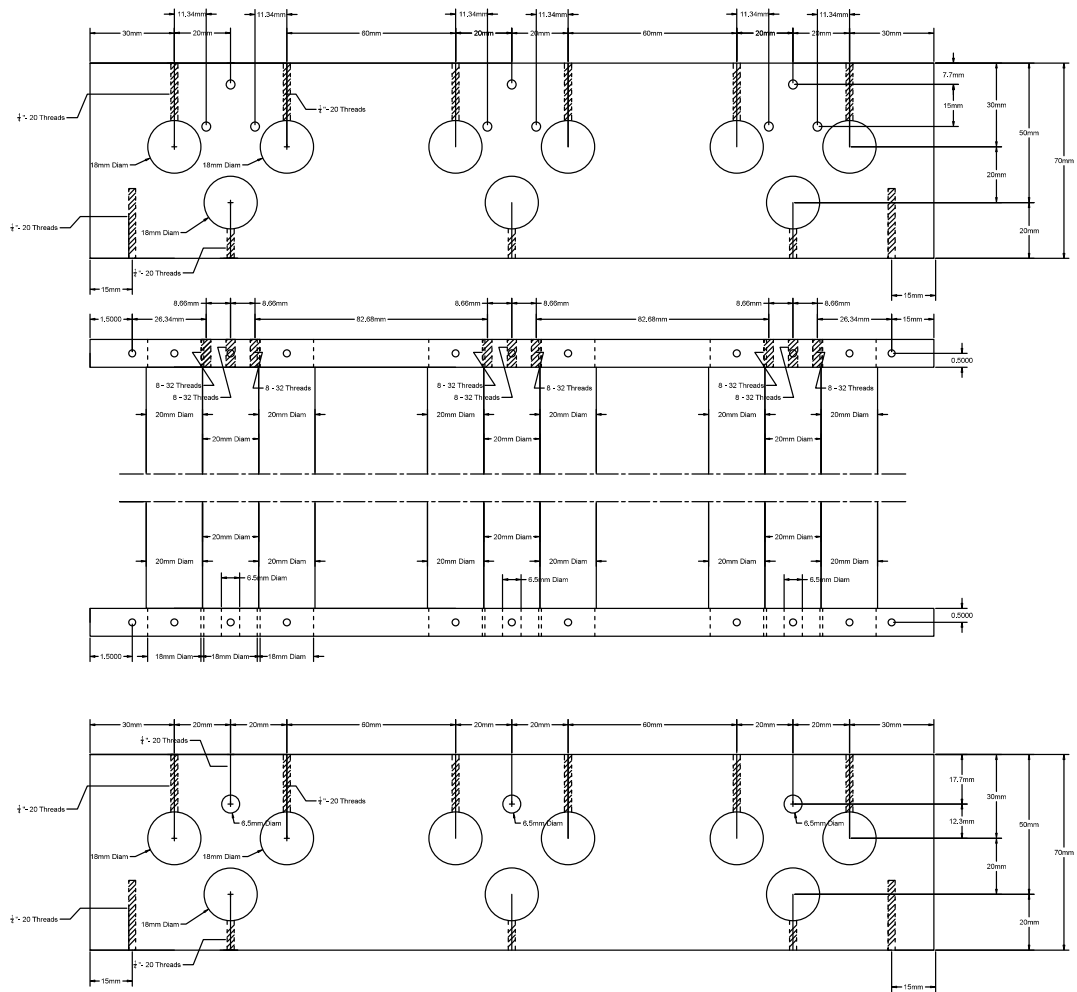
CAD drawing of corrugated tube test rig (Version 2)
